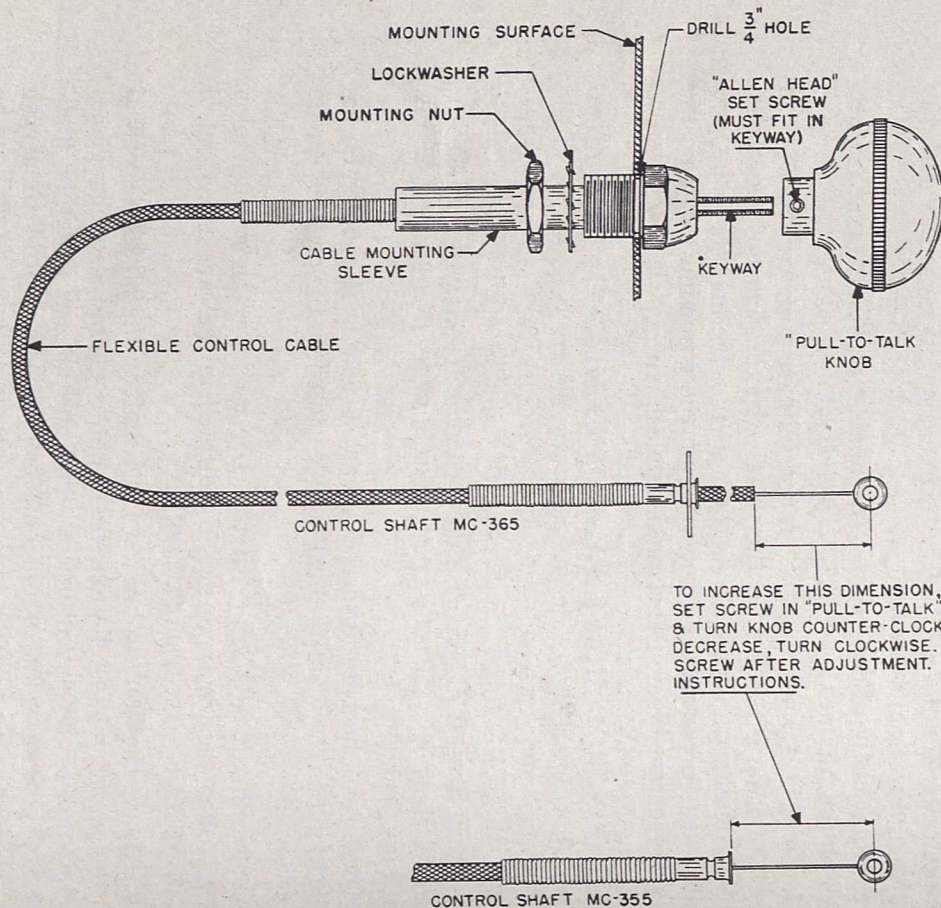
CONTROL SHAFT MOUNTING MC-365 AND MC-355, INSTALLATION AND ADJUSTMENT DETAIL
